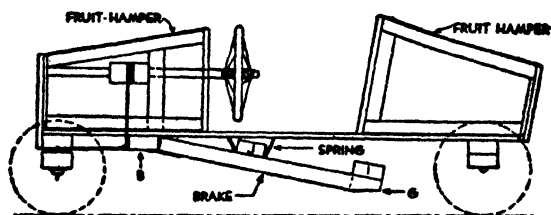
SIDE VIEW OF ASSEMBLED CAR
